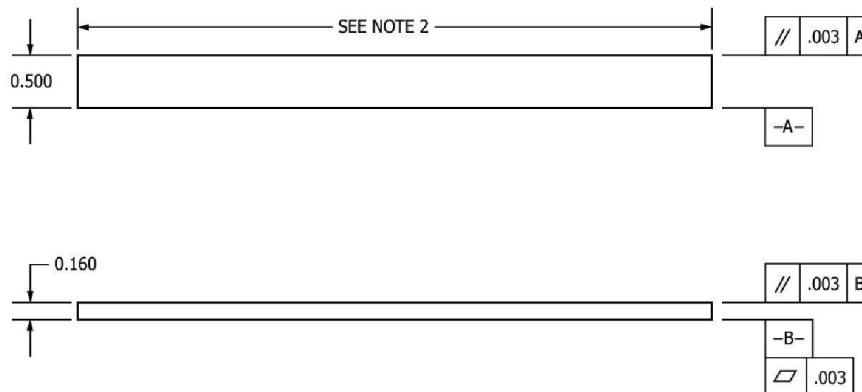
Standard Flexural Test Specimen Drawing (Inch-Pound)
